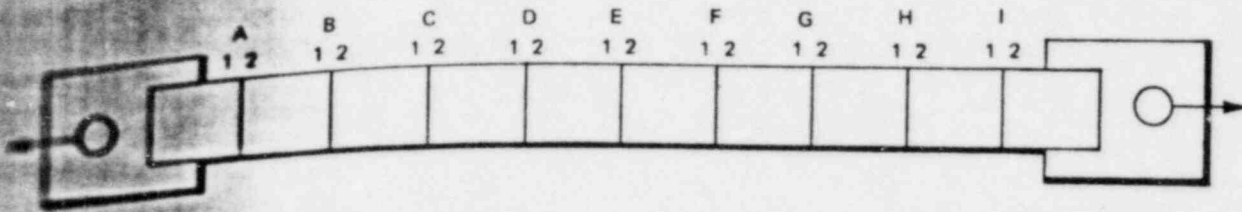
Weld Identification for Large Environmental Fatigue Pipe Tests
